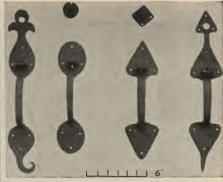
Adaptation of Old Door Latch Handles to Assemble with and Operate a Modern Cylinder Front Door Latch. The top of the outside handles forms the escutcheon for the key cylinder.
